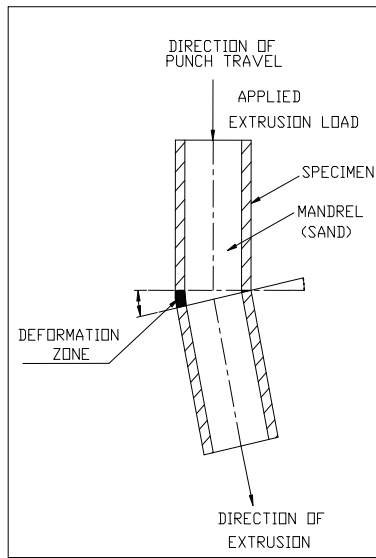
Schematic diagram showing direction of punch travel, mandrel, deformation zone and exit direction of extrusion of the tubular specimen used for ECAP
